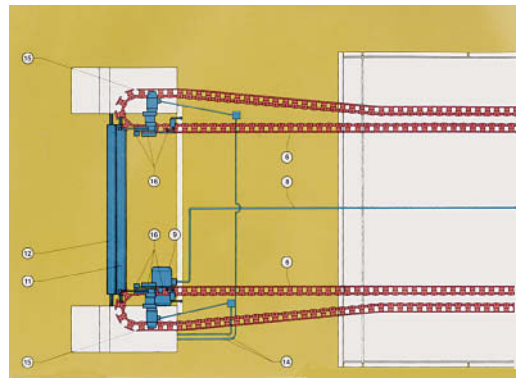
A Babcock stenter with horizontal chain layout. 6 = chain; 8 = control cable; 9 = main chain drive motor; 11 + 12 = traction rollers; 14 = control cables for coordinating overfeeding and chain speed; 15 + 16 = shrinkage machine (overfeed setting).
